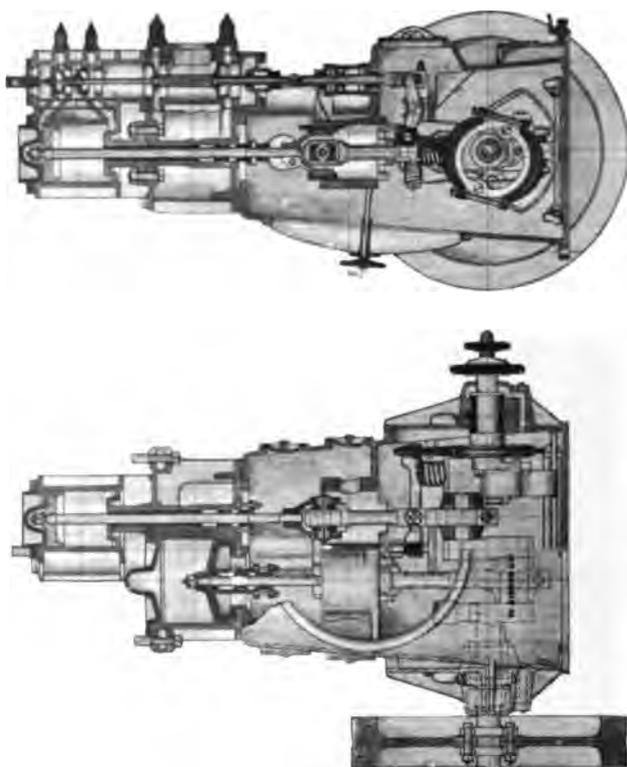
SECTIONAL VIEWS OF MESSRS. W. SISSON & CO.'S HIGH SPEED ENGINE.
